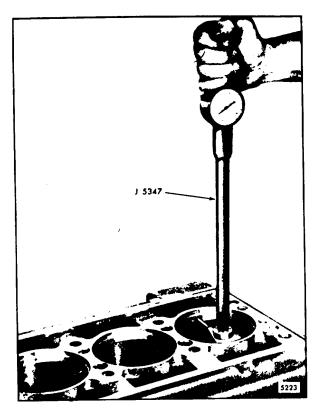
Checking Cylinder Block Bore with Tool J 5347
